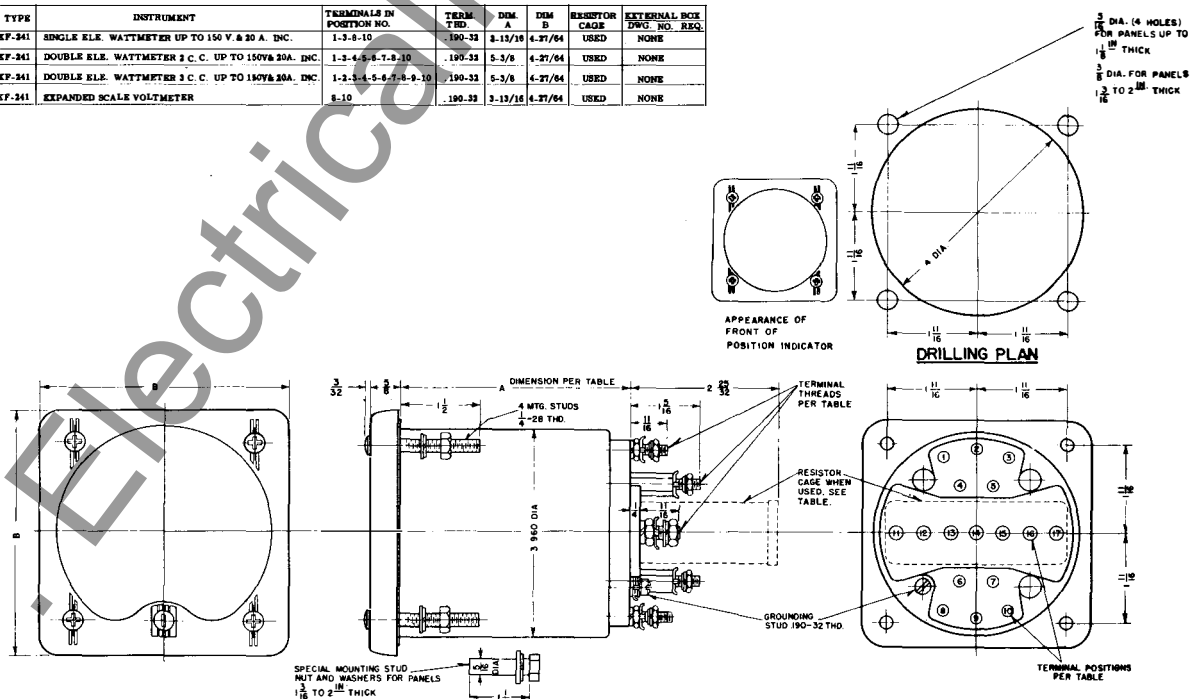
Outline Dimensions and Drilling Plan for Type K-241 Instruments.
